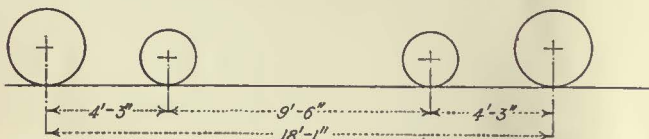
Arrangement of Axles of the Motor Car Shown in Fig. 4
